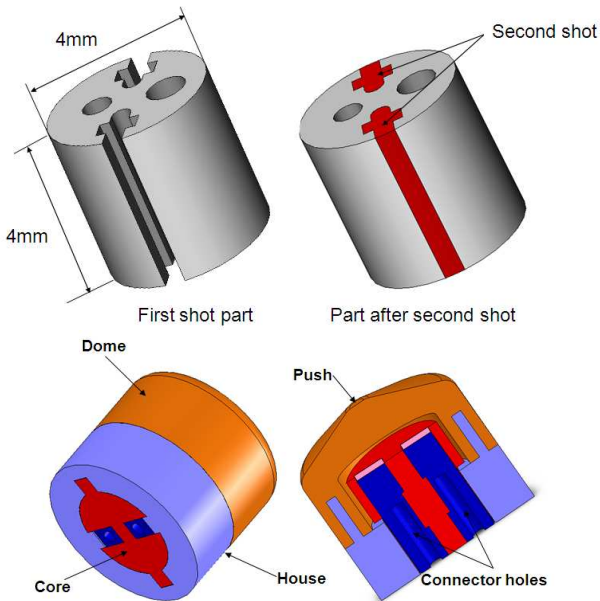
Concept of design based on two-component micro injection moulding. Top: core. Bottom: assembly of core, house and dome.
